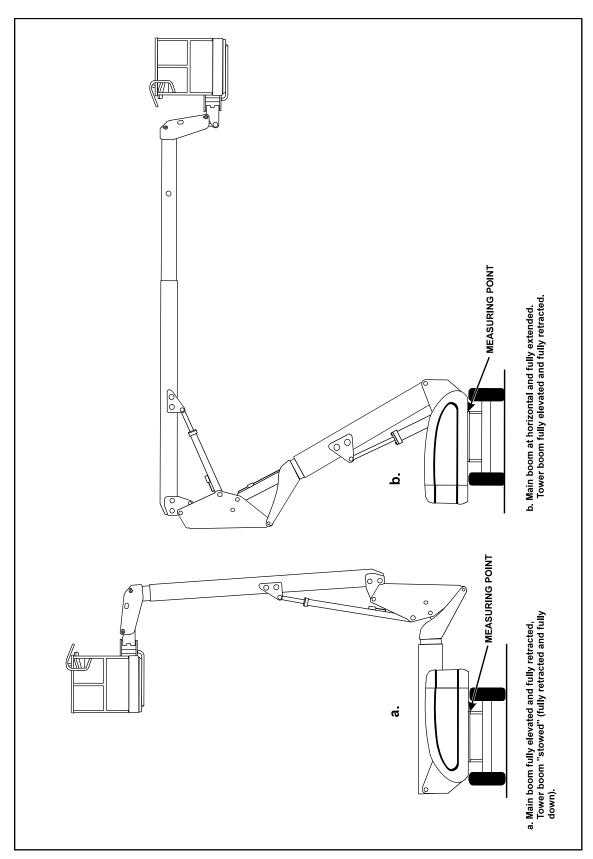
Swing Bearing Tolerance Boom Placement (A Models)
